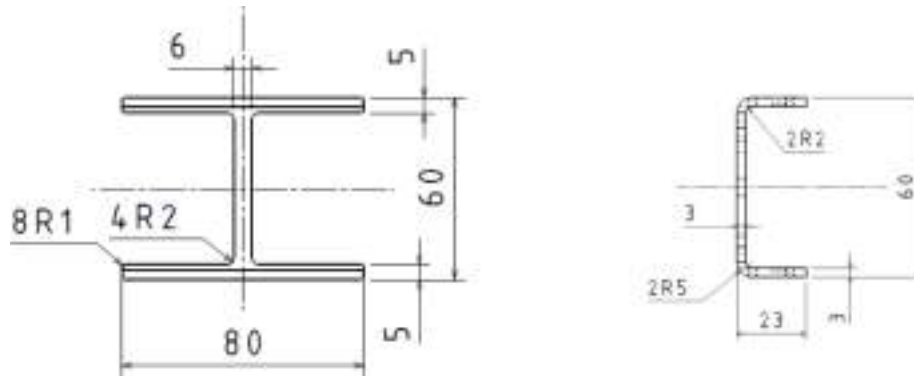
Dimensions of the I-shape and C-shape beams used for cathode frame construction.
